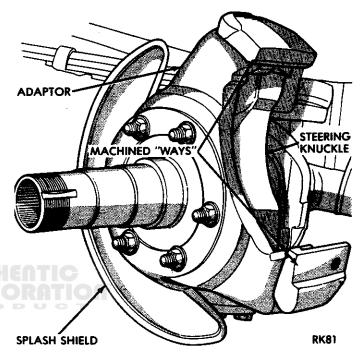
Caliper Mounting Adapter Attachment DISC BRAKE OPERATION
